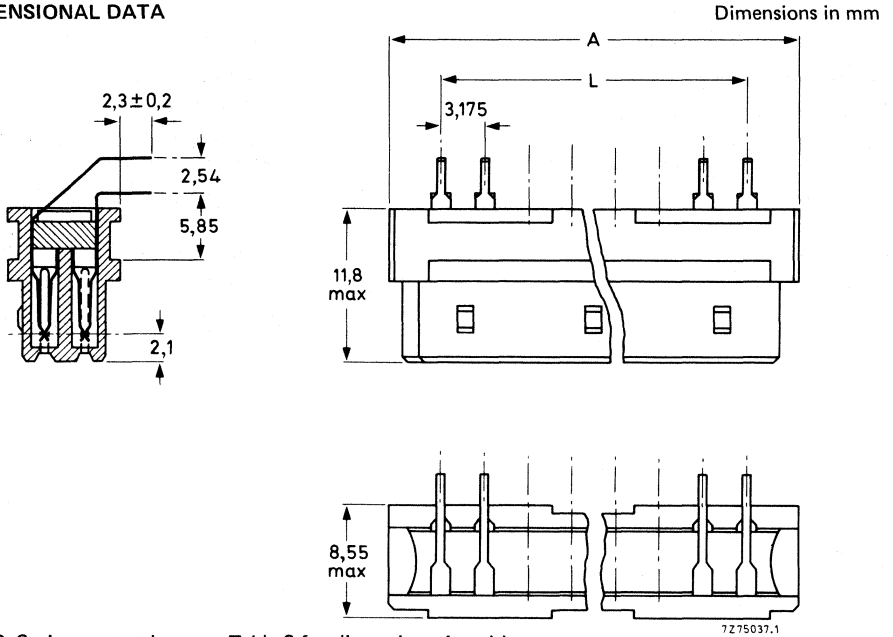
Spring contact box; see Table 2 for dimensions A and L.
